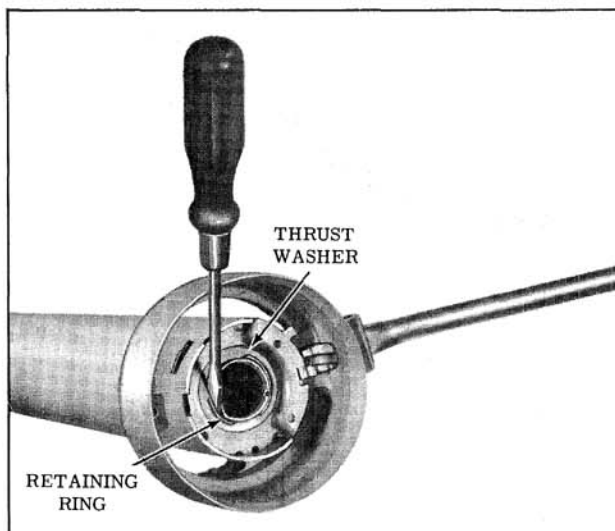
Removing Shift Tube Upper Retaining Ring
